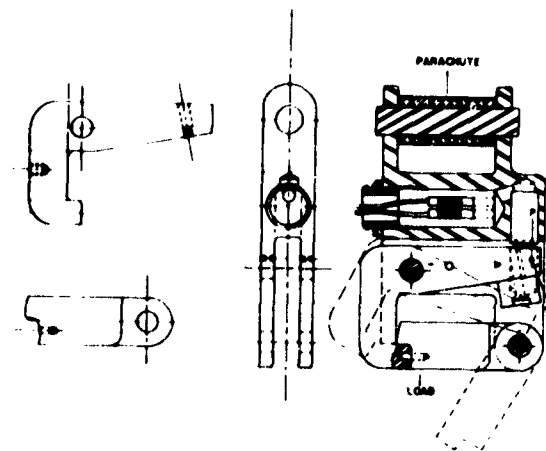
Parachute Canopy Release Assembly, Latch Type
